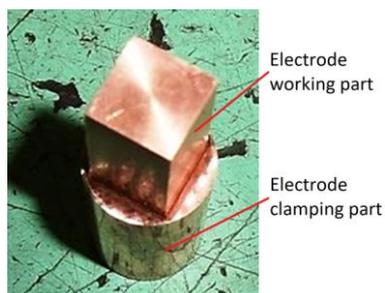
Compact Cu STE with working part dimensions of 15x15x30 mm
